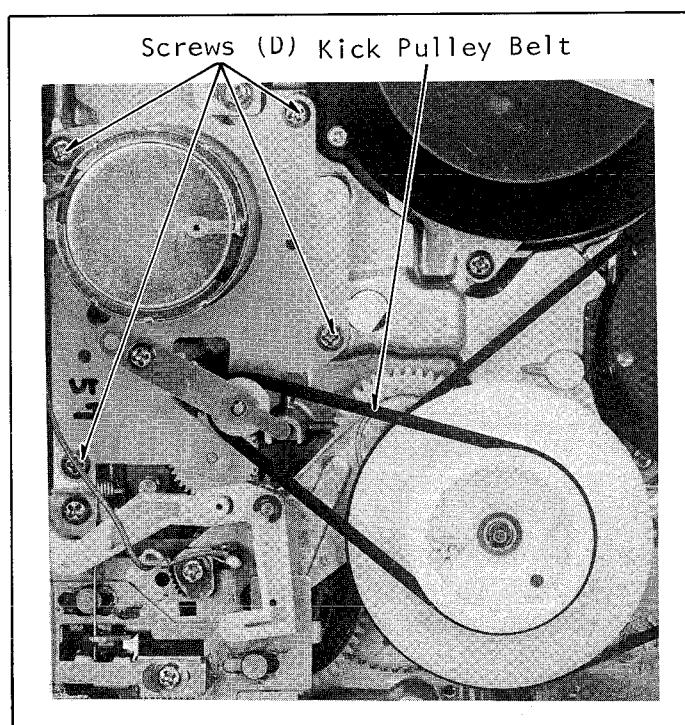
Adjustment of Cam Gear and Mode Select Switch - (10)
